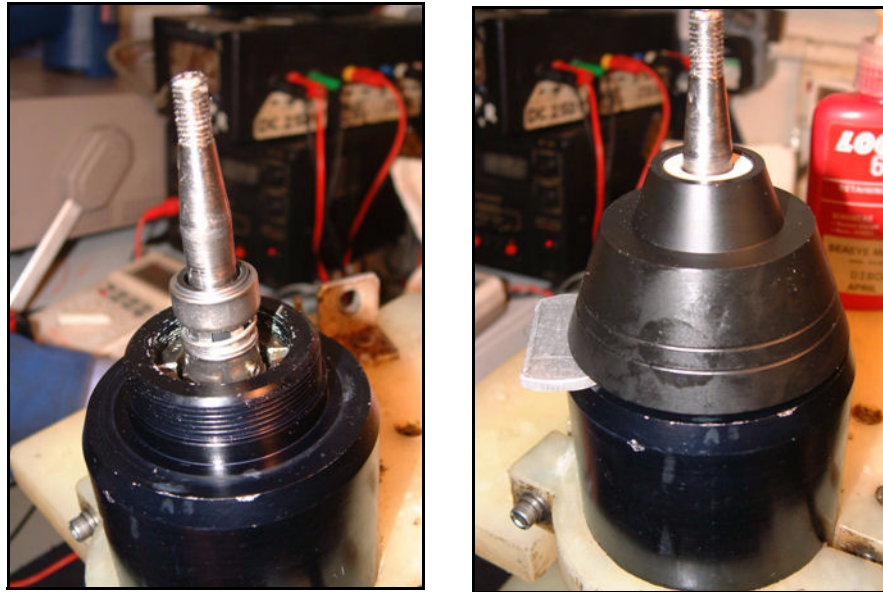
Shaft Seal and 3mm Fitting tool
